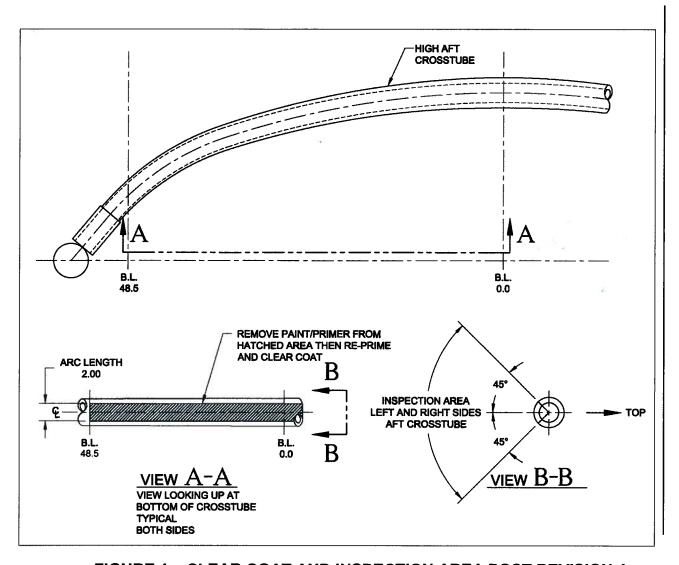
CLEAR COAT AND INSPECTION AREA POST REVISION A
